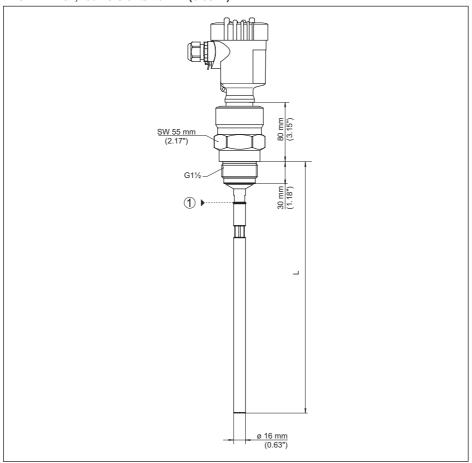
VEGAFLEX 82, rod ø 16 mm (0.63 in), threaded version
